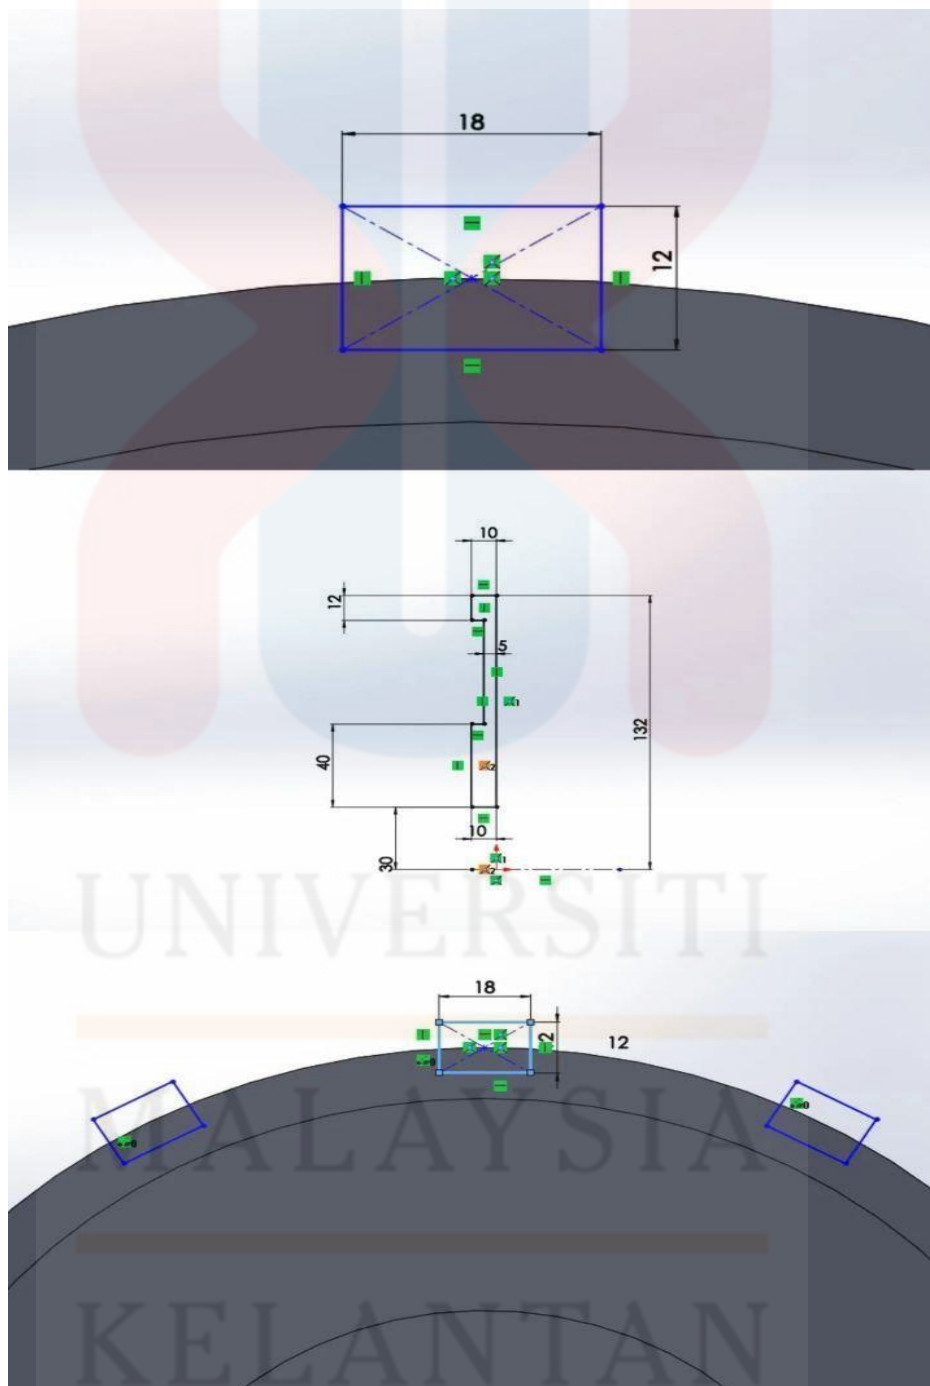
2D Sketching of Flywheel Thresher Machine
